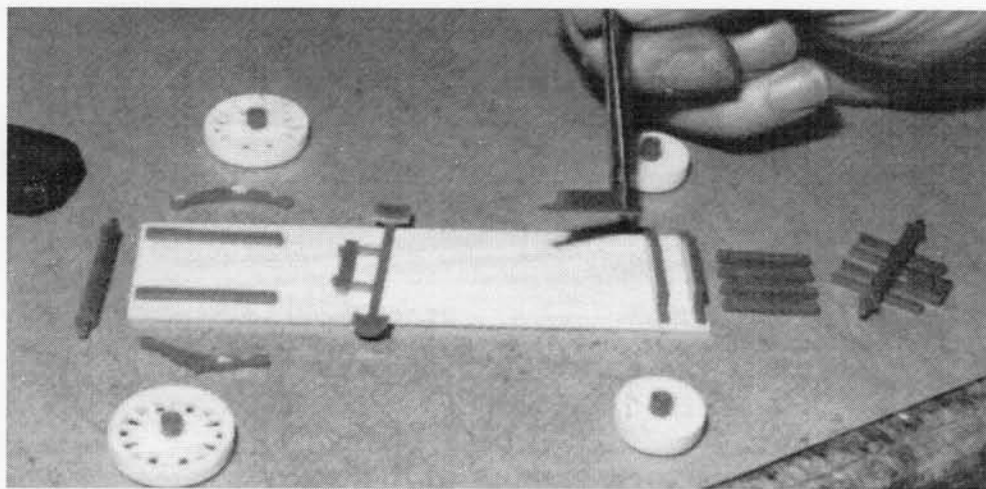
For extended wagon chassis, cut all undergear from original chassis and assemble on a new plastic sheet cut to size.
